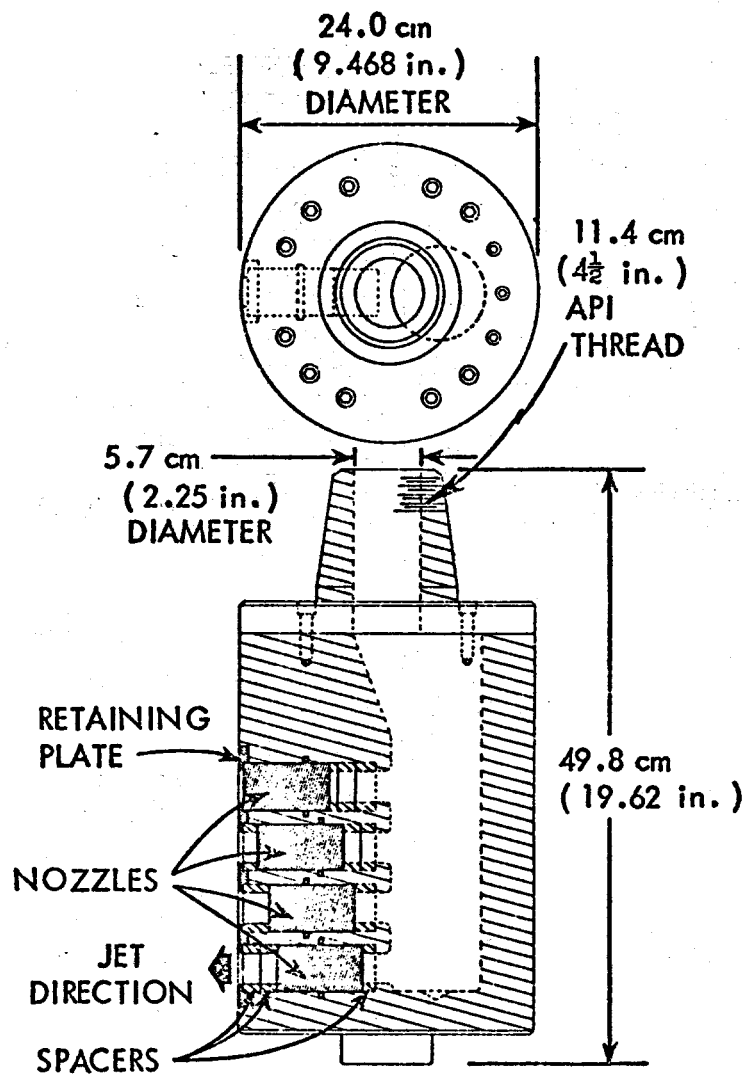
DRAWING OF THE FOUR-NOZZLE TOOL: used for stationary-nozzle testing at D.R.L.
